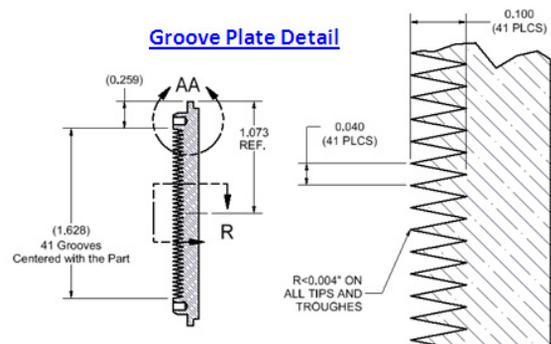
Detail of grooved plate welded into SCW beampipe. The plate is copper with 41, 1mm spaced triangular grooves.
